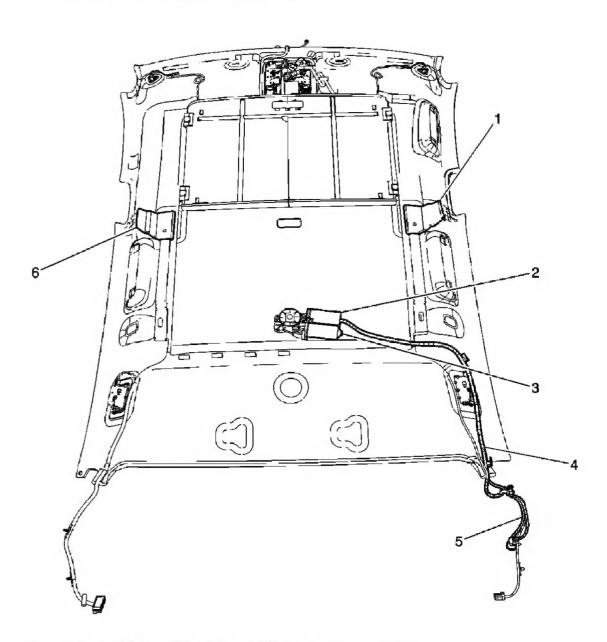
Identifying Headliner Components w/CF5 Courtesy of GENERAL MOTORS CORP.
